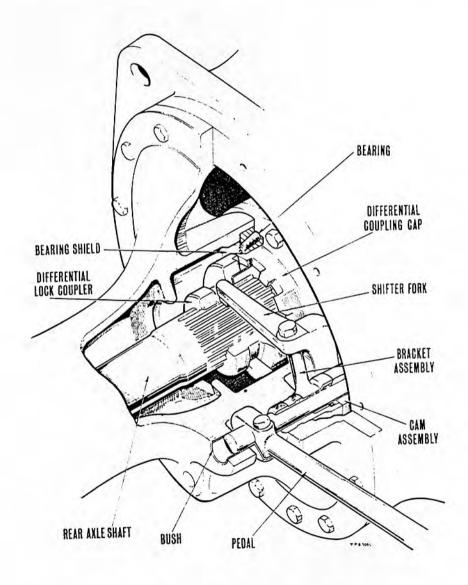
CUT-AWAY VIEW OF REAR AXLE
